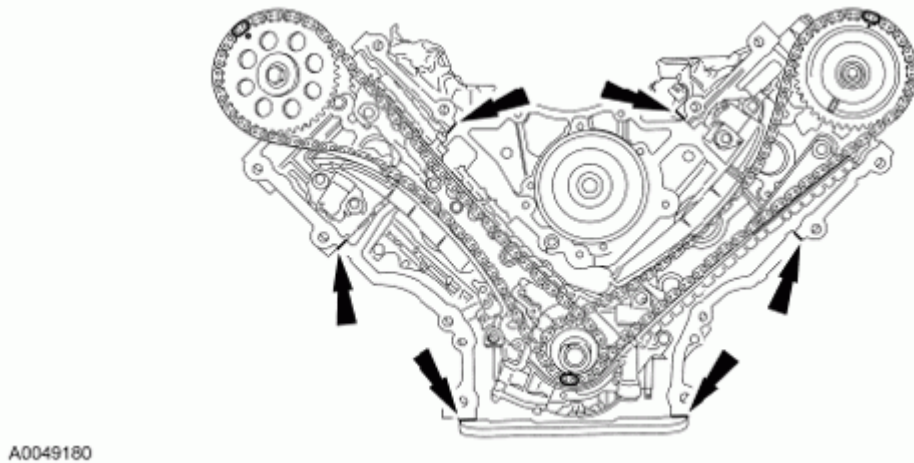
Locating Head-To-Block Surface And Oil Pan-To-Block Surface Sealant Applying Area
